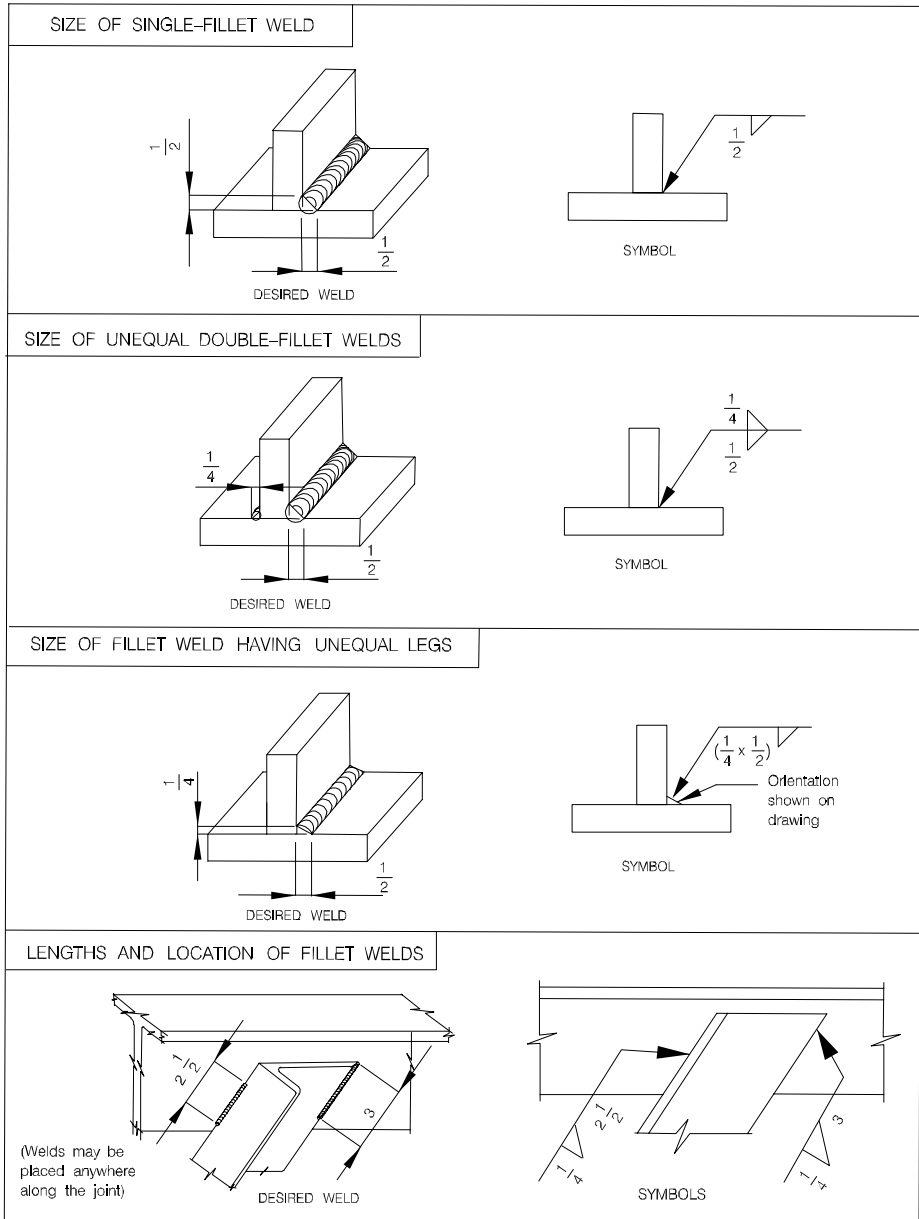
Application of Symbols – Fillet Welds – Dimensions
